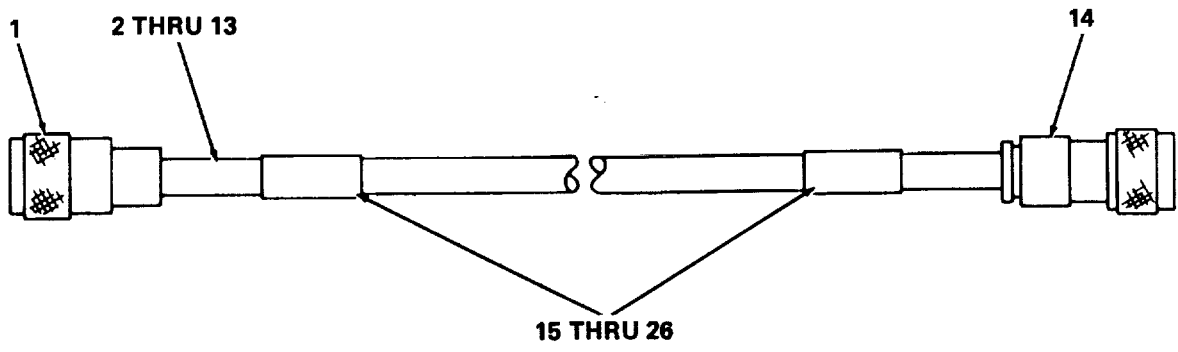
Cable Assemblies 1703-1-3128 (GR1-GR12)
